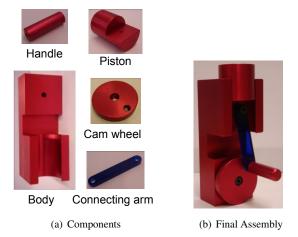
Piston-Cylinder Manufacturing and Assembly Project
